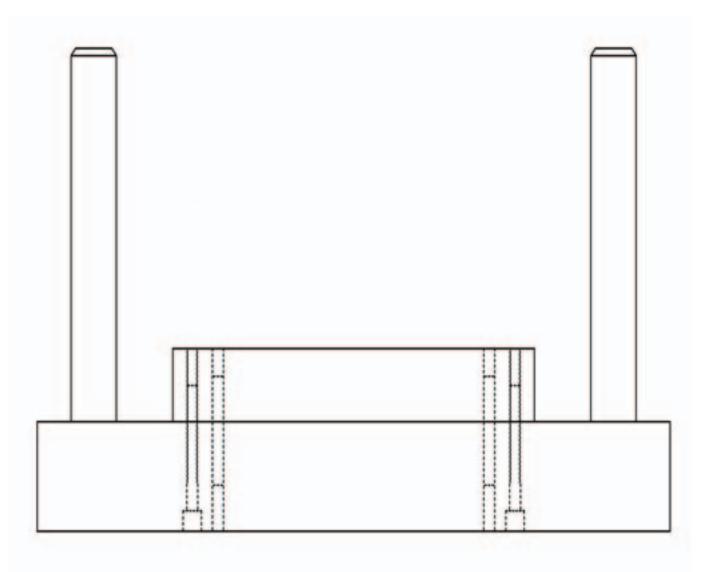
8 Mount Hardened Die Section The die section is mounted on the die set with screws and dowels.
